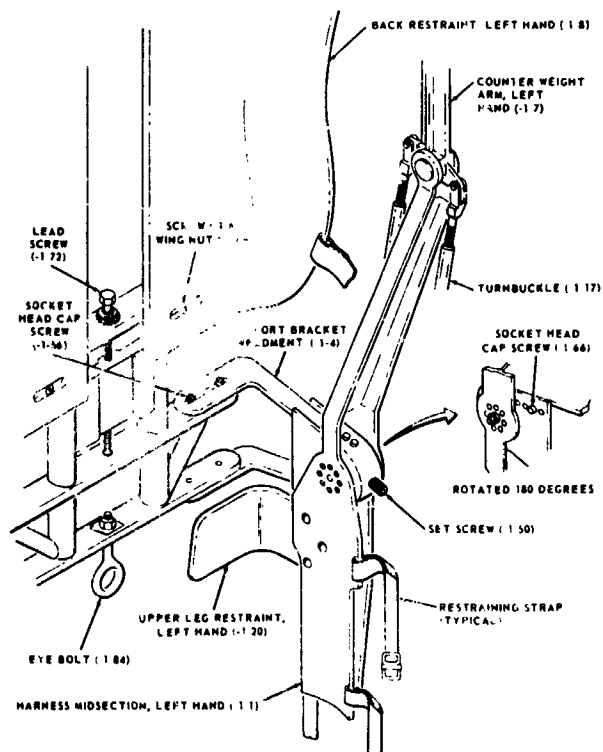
ADJUSTING HARNESS ASSEMBLY
